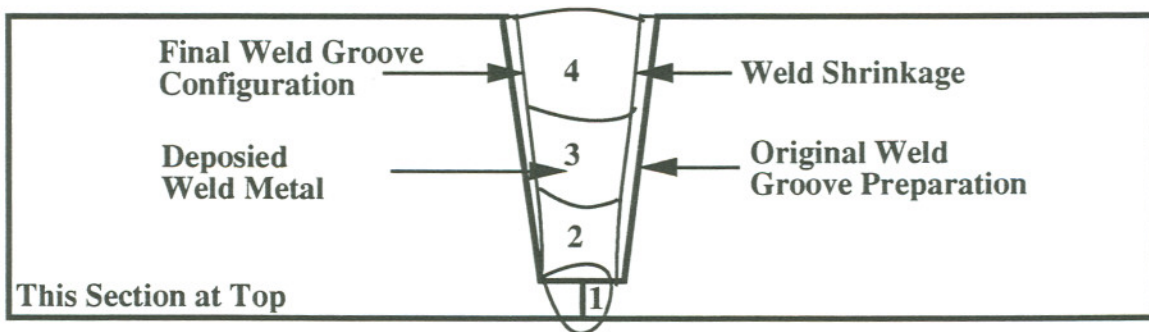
Four-Pass Weldment Pass Sequence
